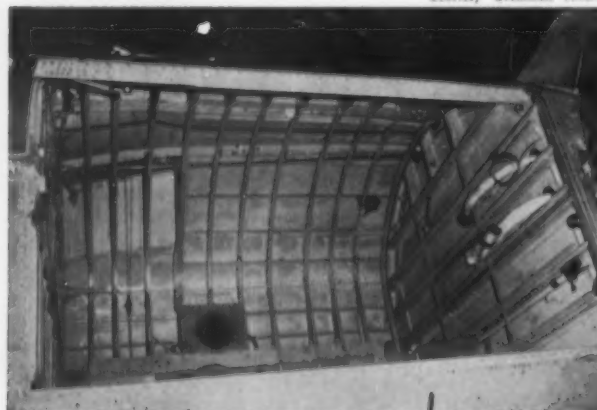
Same compartment with side and bottom parts of liner in place. Points of assembly are at frame and around access ports
